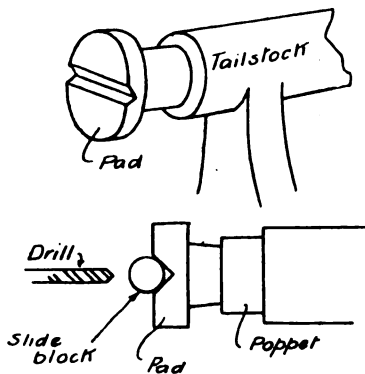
DRILLING THE SLIDE-BLOCKS.
